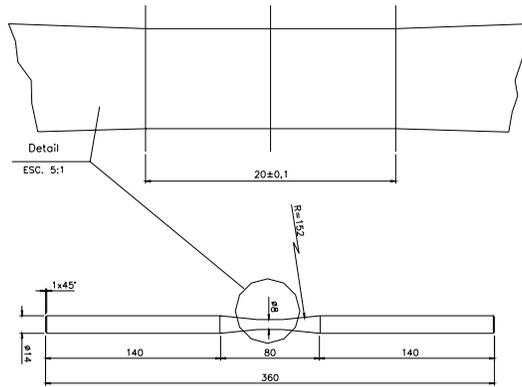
Fatigue test specimen configuration. Dimensions in mm.
